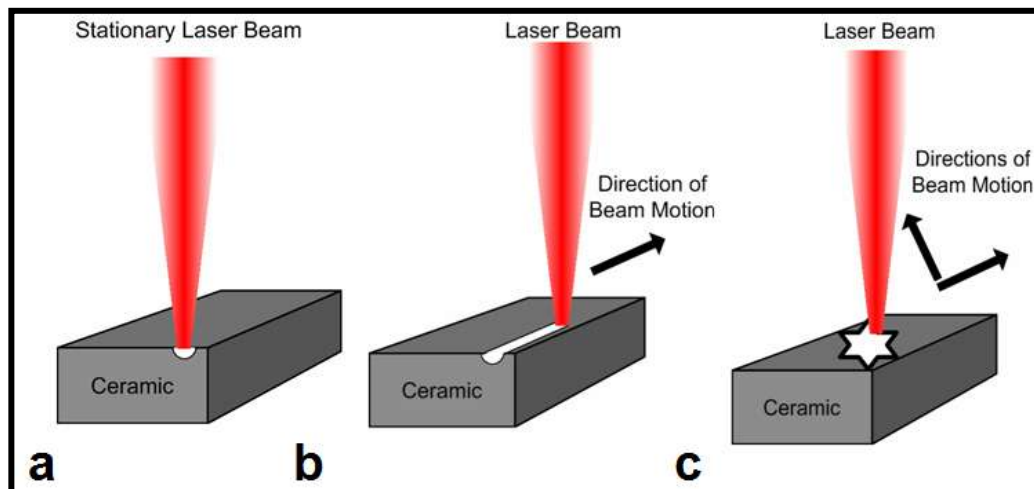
Schematic of basic laser machining processes a) laser drilling (one-dimensional machining), b) laser cutting (two-dimensional machining), c) engraving a star by laser beam (three-dimensional machining) [1].
